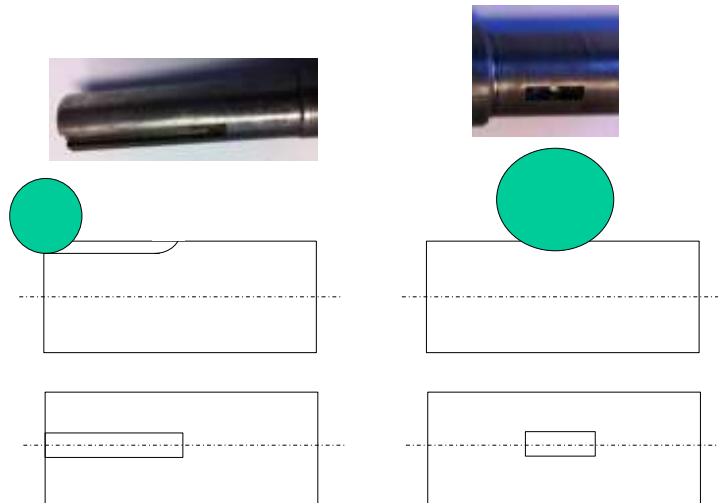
Several keyways. (a) Keyways in the shaft and the larger worm gear shown in Chapter 1 (note that the left one is made by a side-mill cutter while the other by a
